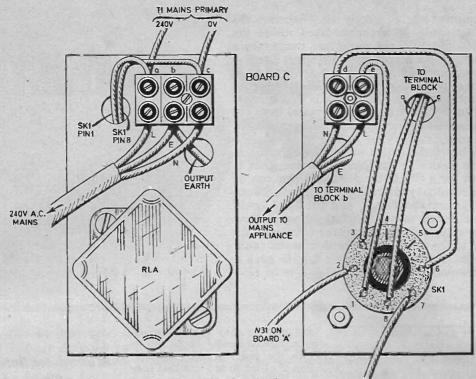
The layout of the relay socket and terminal blocks on board C and wiring details to other boards.
